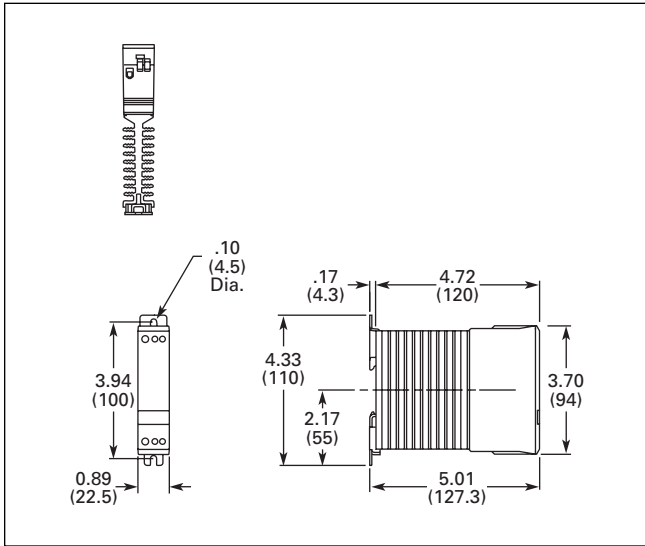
22.5 mm Frame — Approximate Dimensions in Inches (mm)
